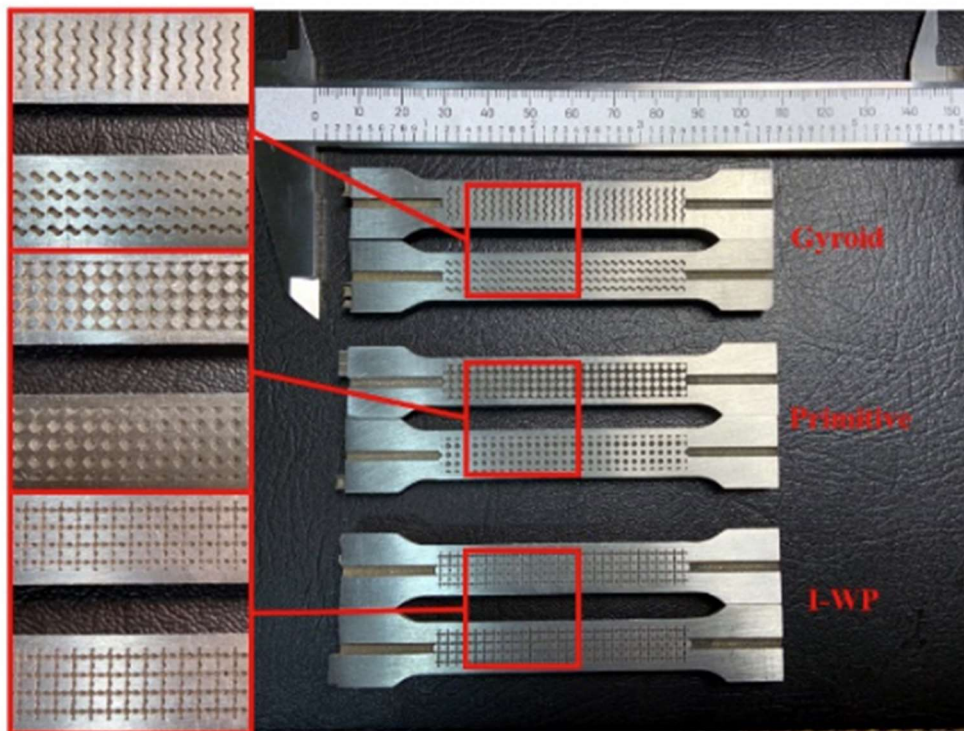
The porous test specimens manufactured by SLM ¹⁵
